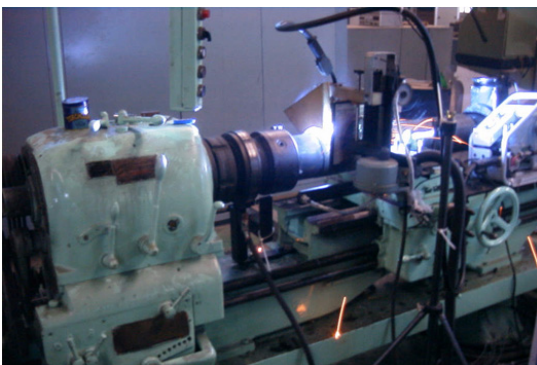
Experimental setup of GMA welding for the wear resistance of contact tip
